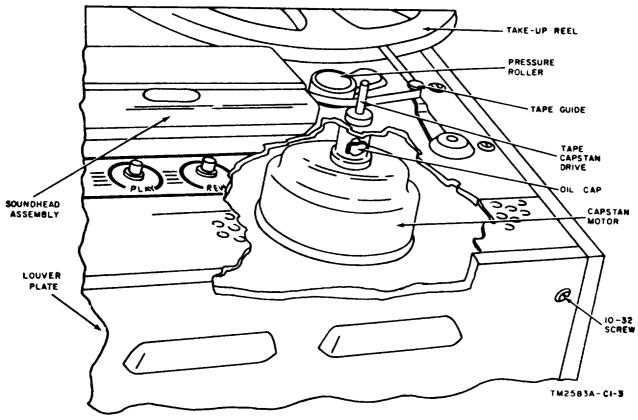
(Added) Capstan motor, location oil filler cap.
